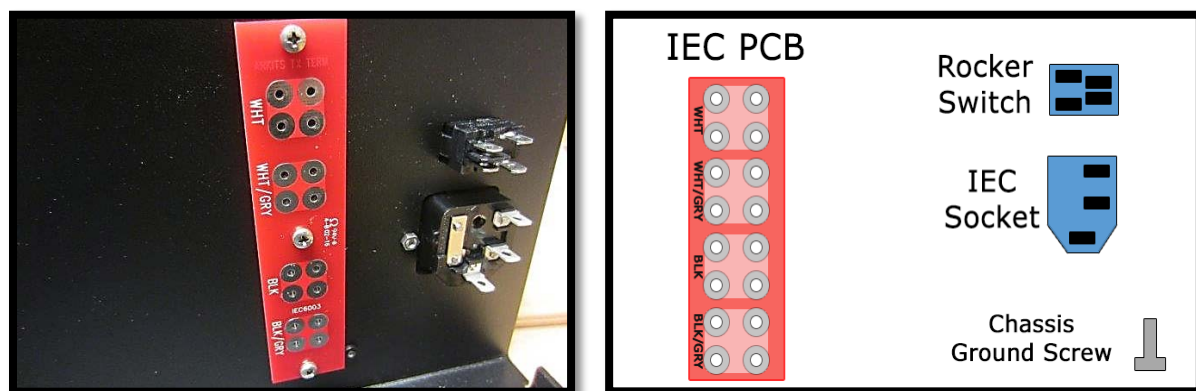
IEC PCB, Rocker Switch, and IEC Socket
